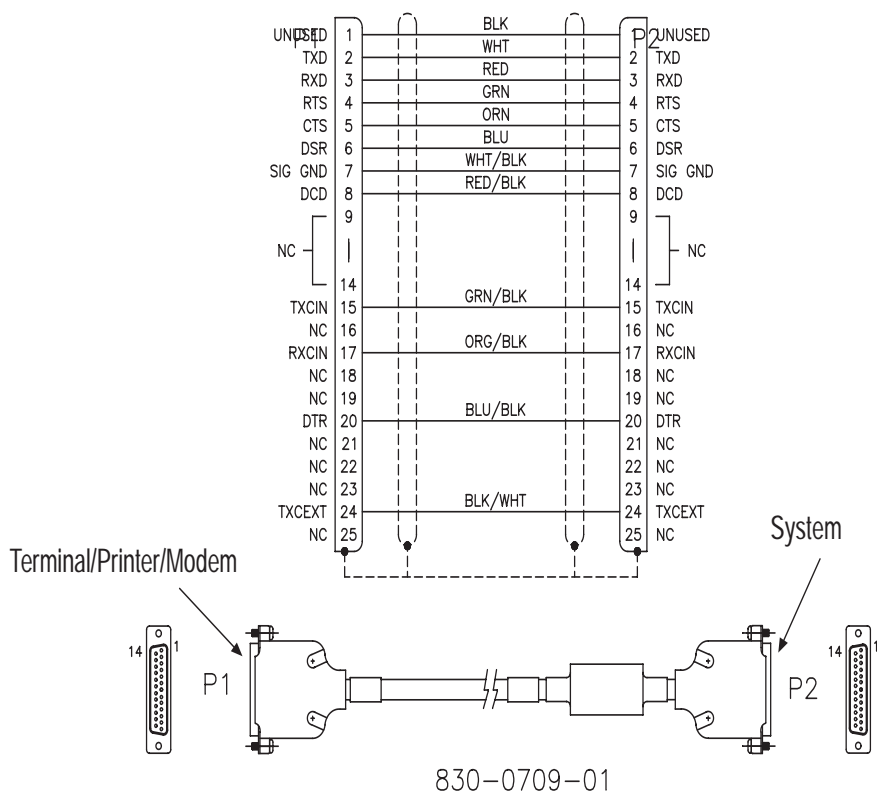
Man-Machine Interface Port Cable P/N 830-0708-01
